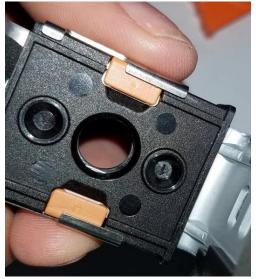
Orange tabs inserted with latching mechanism disengaged and good alignment for hole
